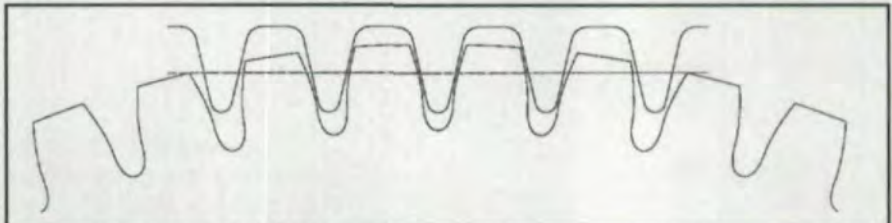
Thinned worm tooth, thick gear tooth modification.
